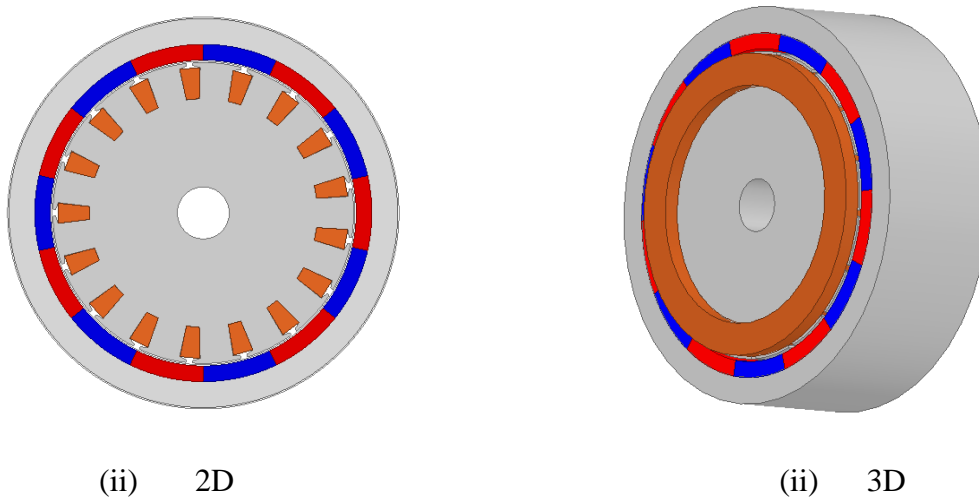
2 PMECCs equipped with squirrel cage rotor
